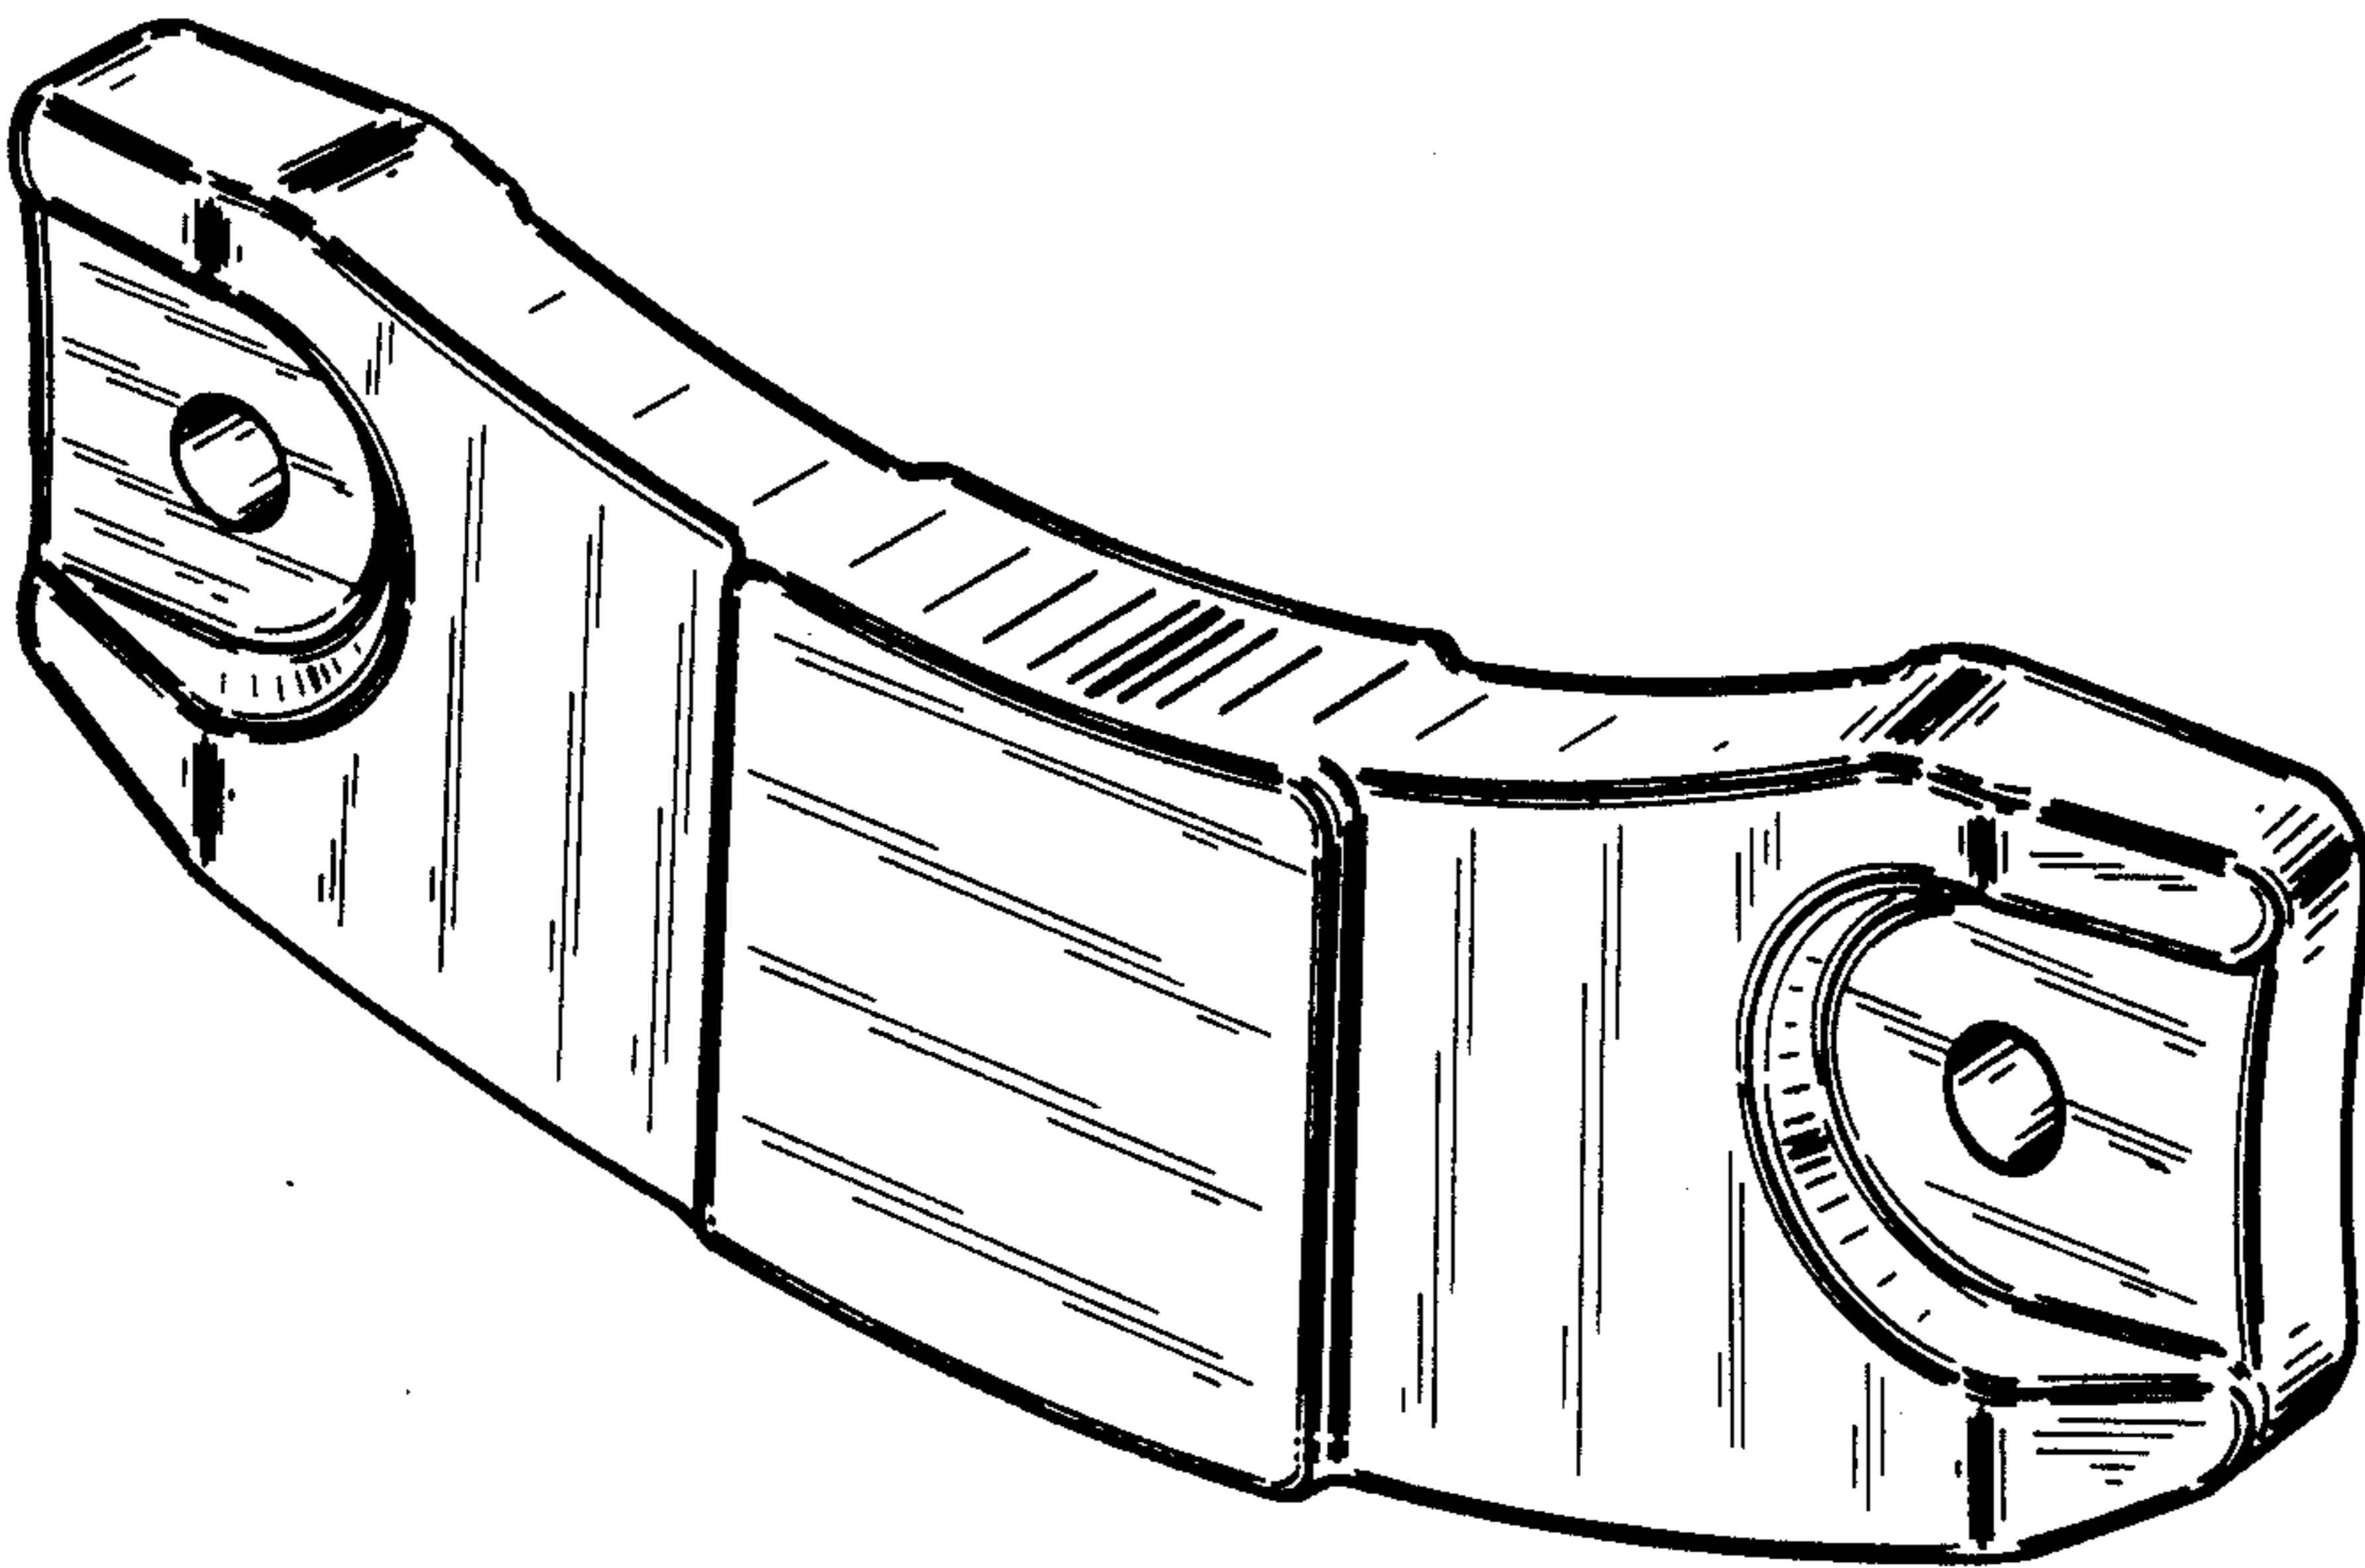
is a front perspective view of a disc brake pad yoke embodying my design looking from the right.
